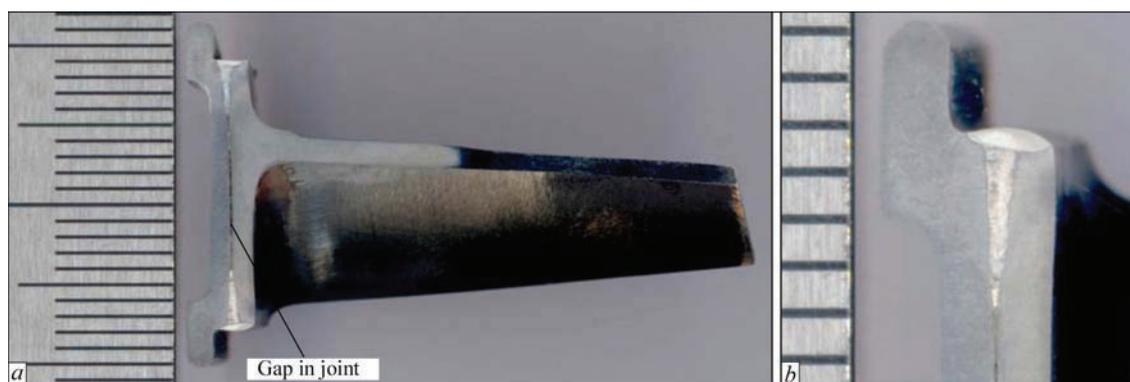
Macrosection of cross section of EB-joint of blade with guide case semi-ring received at up to 0.1 mm gap in joint (a) and section area containing the weld itself (b)
